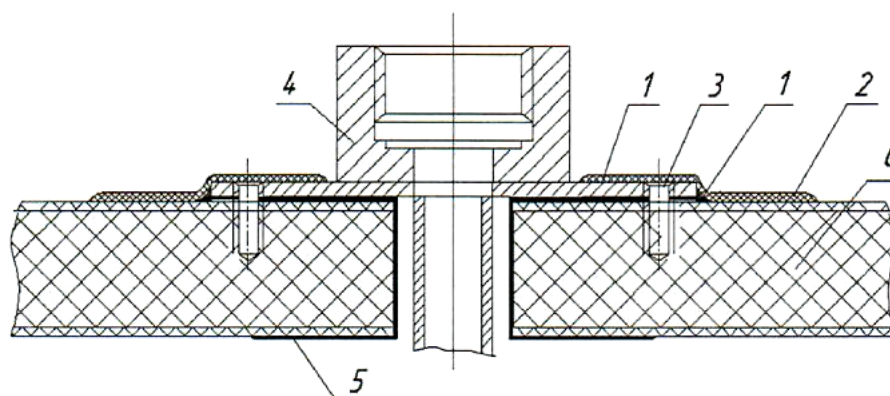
Mounting assembly of the pipeline nipple in the tank shell
